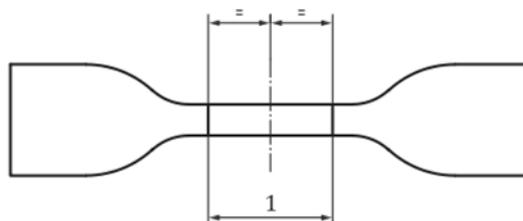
ISO 37 test specimen shape for tensile testing of elastomers – 1. The gauge length of the specimen [5].
